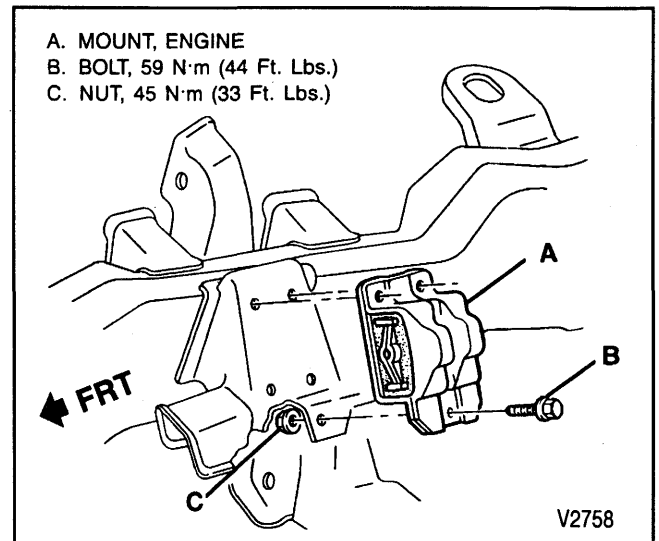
Front Engine Mounting Brackets to Frame (K-Models)
